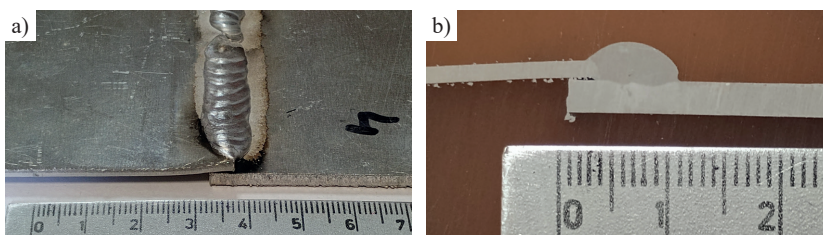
Lap joint of 1,5 and 3 mm thick sheets using the MIG method: a) weld face; b) metallographic section
